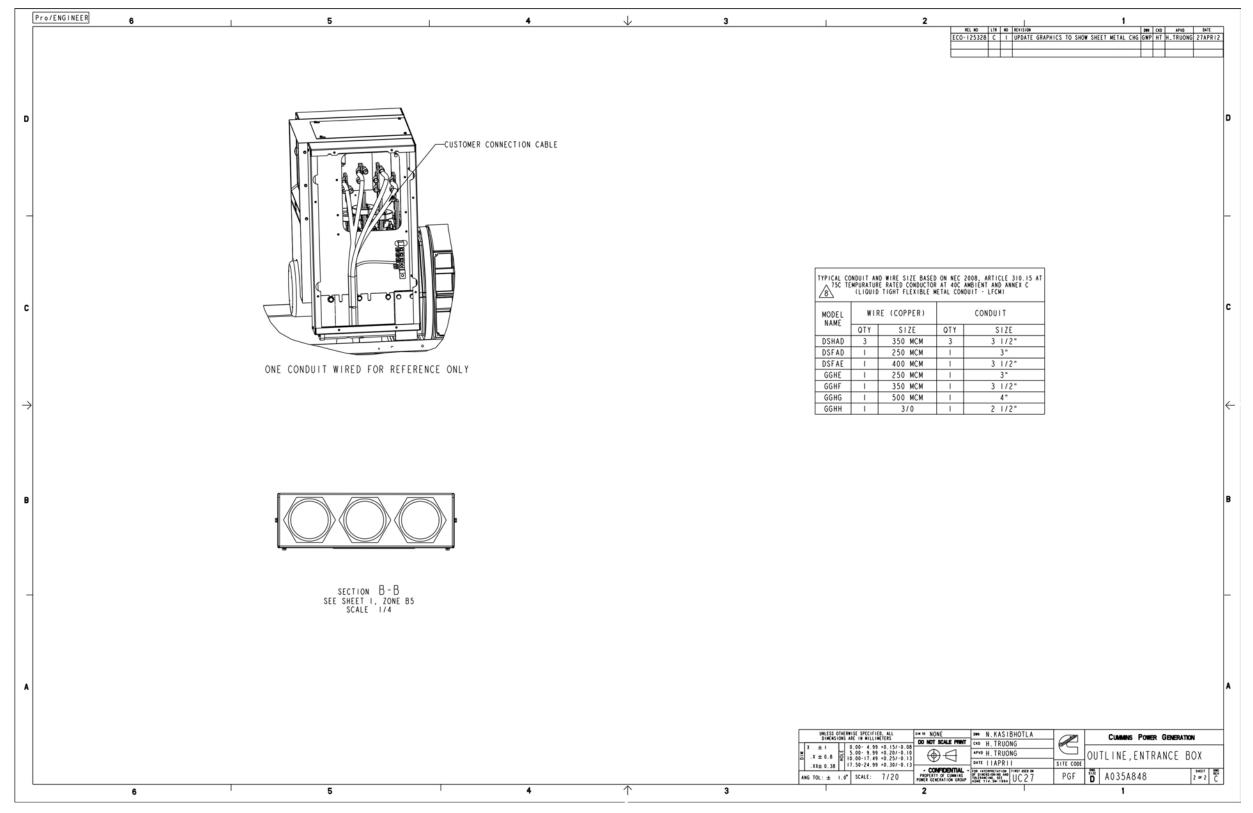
BREAKERLESS CONDUCTOR TERMINAL BOX OUTLINE DRAWING (SHEET 2)
